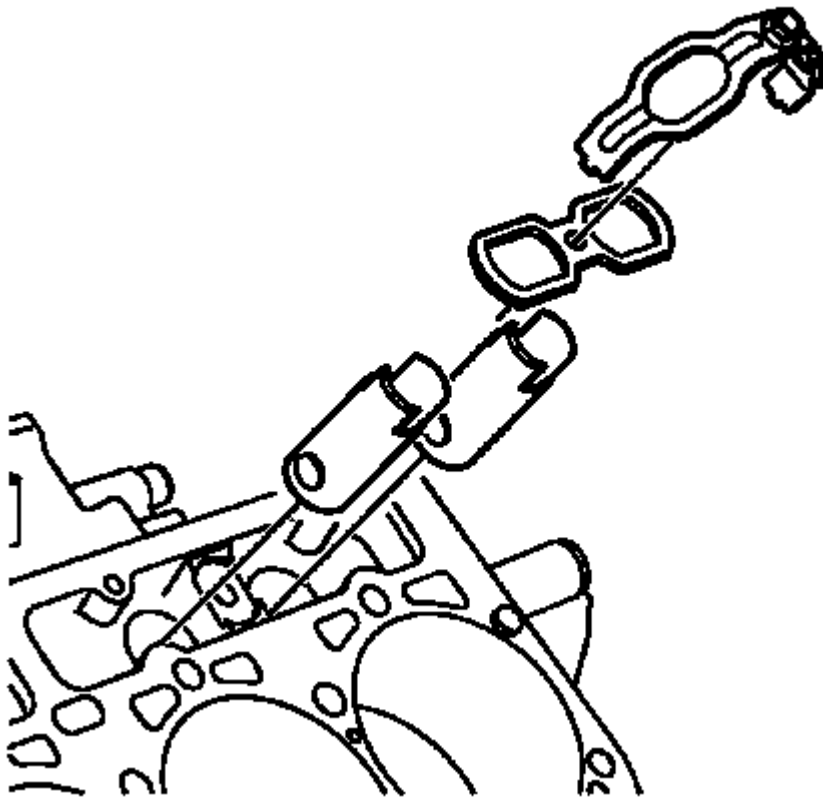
View Of Valve Lifter, Guides, Retainers & Bolts
